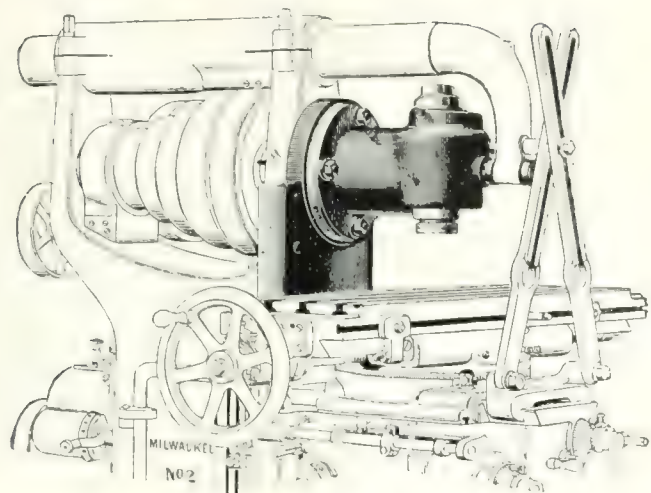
VERTICAL SPINDLE ATTACHMENT.
